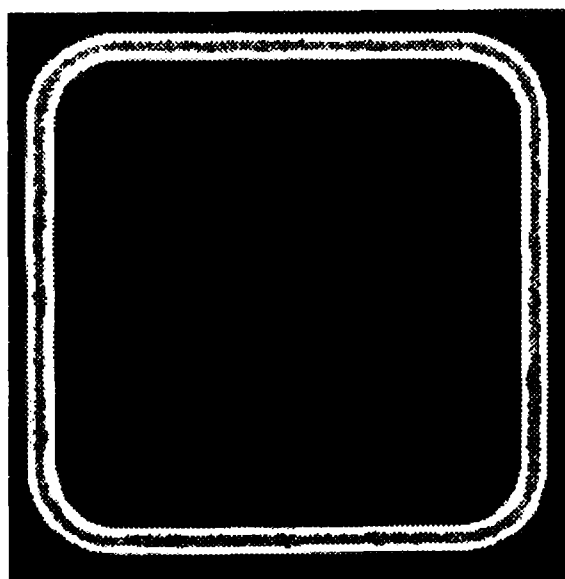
VVR-M5 5-TUBES FUEL ASSEMBLY CROSS-SECTION
